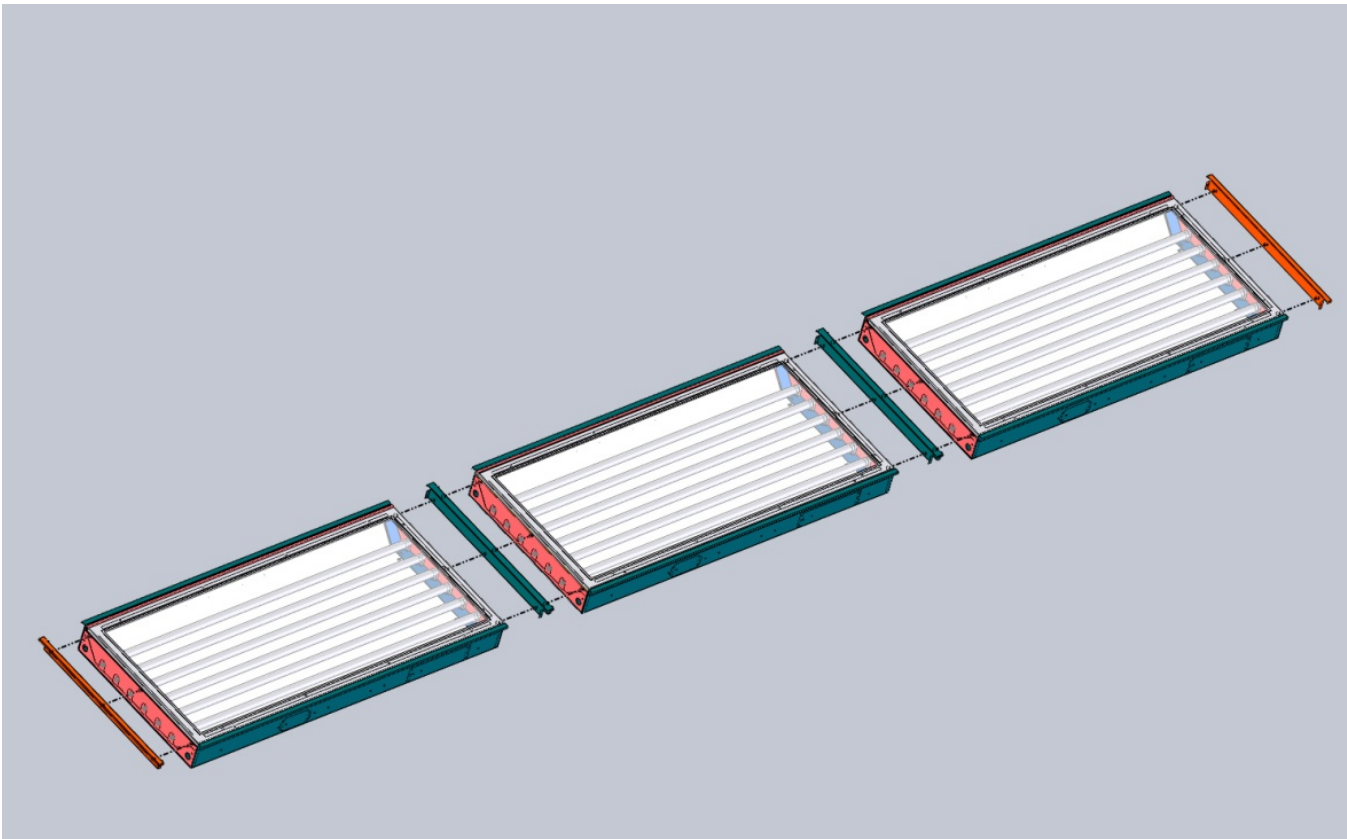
Flange and False Flange Mounting -Three Troffer Design
